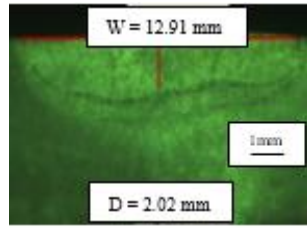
Macrostructure of TIG 2205 DSS weld metal
